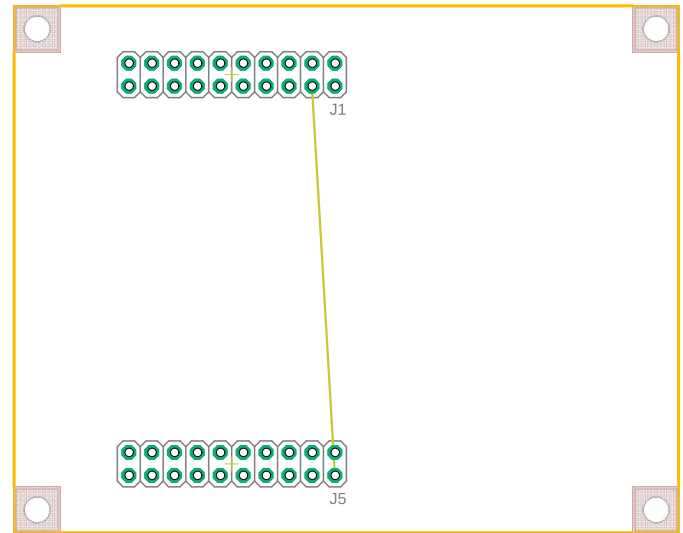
Board layout of a placeholder design block for a TI LaunchPad™ [27].
